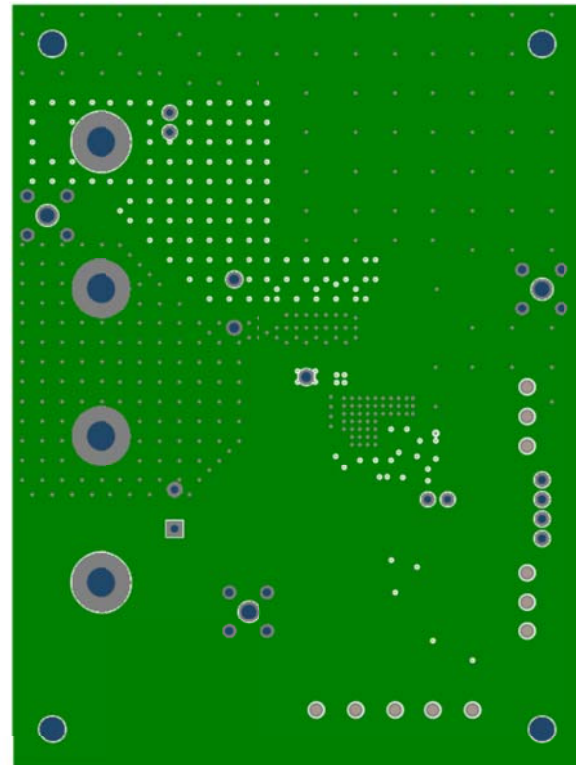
PI33XX-XX-EVAL1 Board Dimensions
